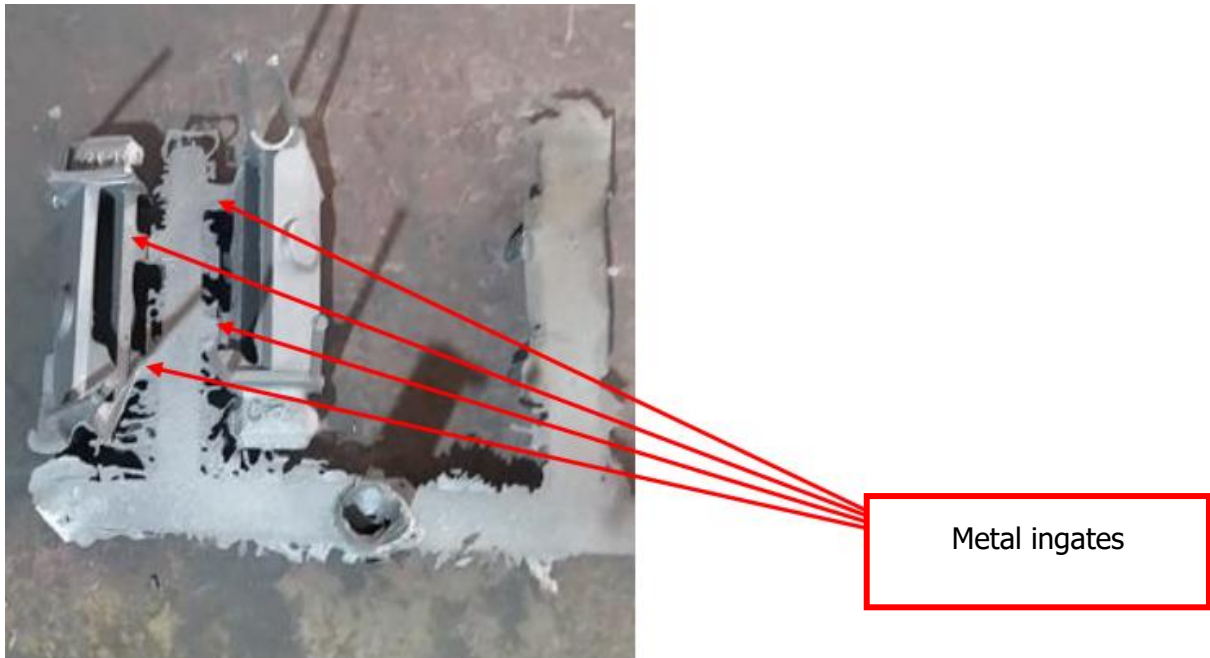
(A&B): Illustrates areas and sections to be cut off by the supplier.
